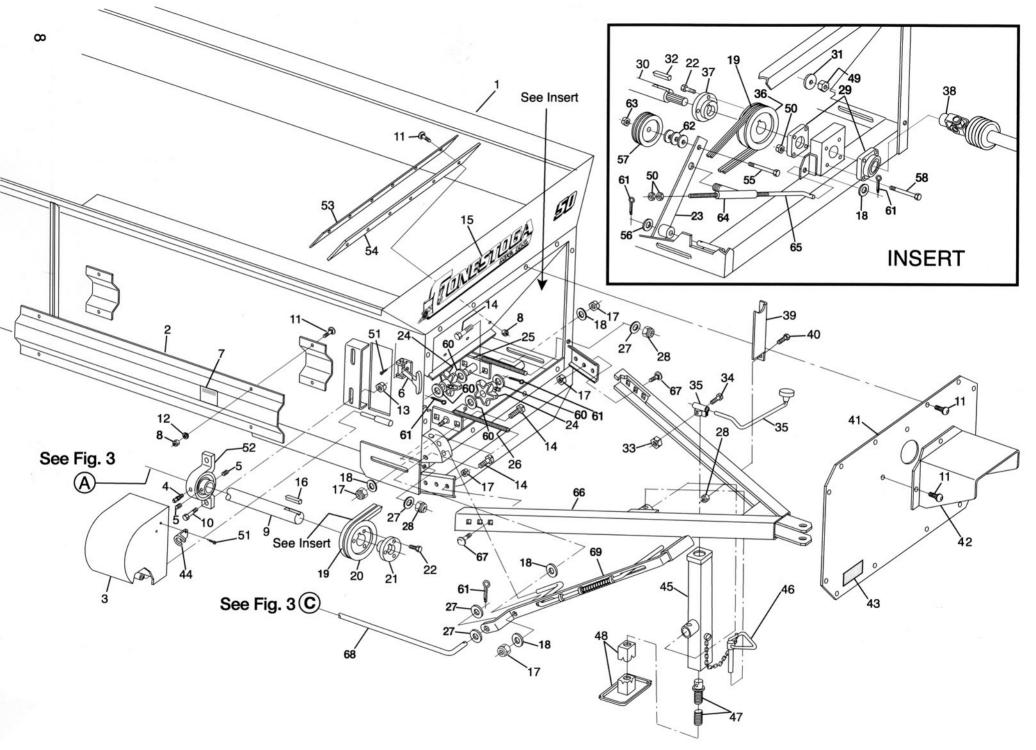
MODELS C-50PTO, C-80PTO, C-125PTO & C-175PTO SPREADER (FRONT VIEW)
